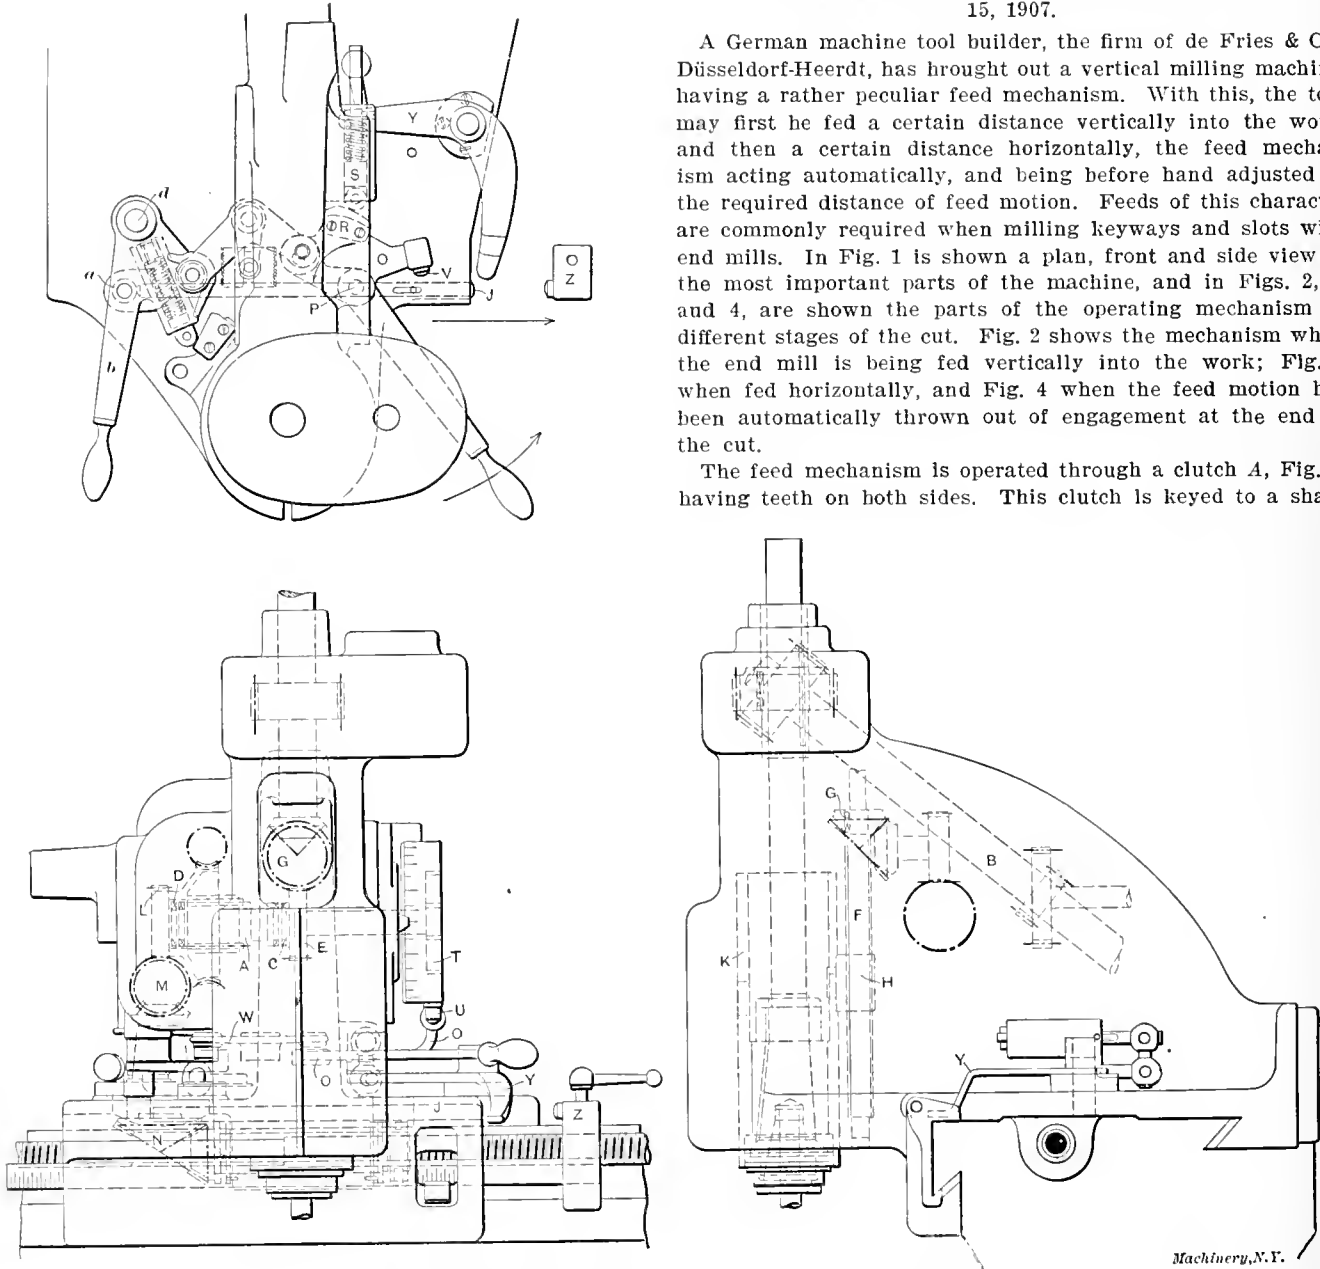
General Arrangement of Vertical Milling Machine with Combined Automatic Vertical and Horizontal Feed.
